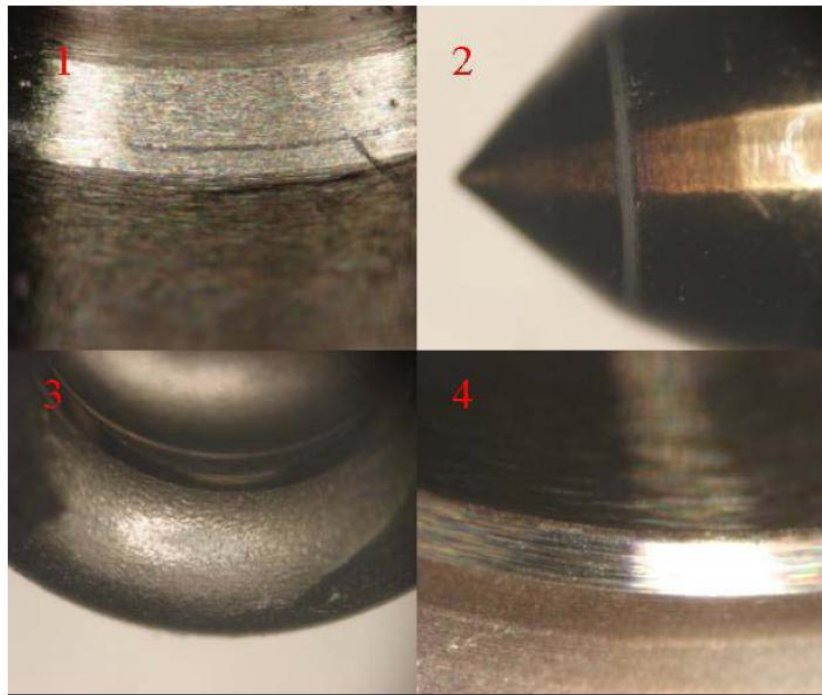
1) Poppet seat 2) Check seat 3) Nozzle spring 4) Valve seat in 642053
